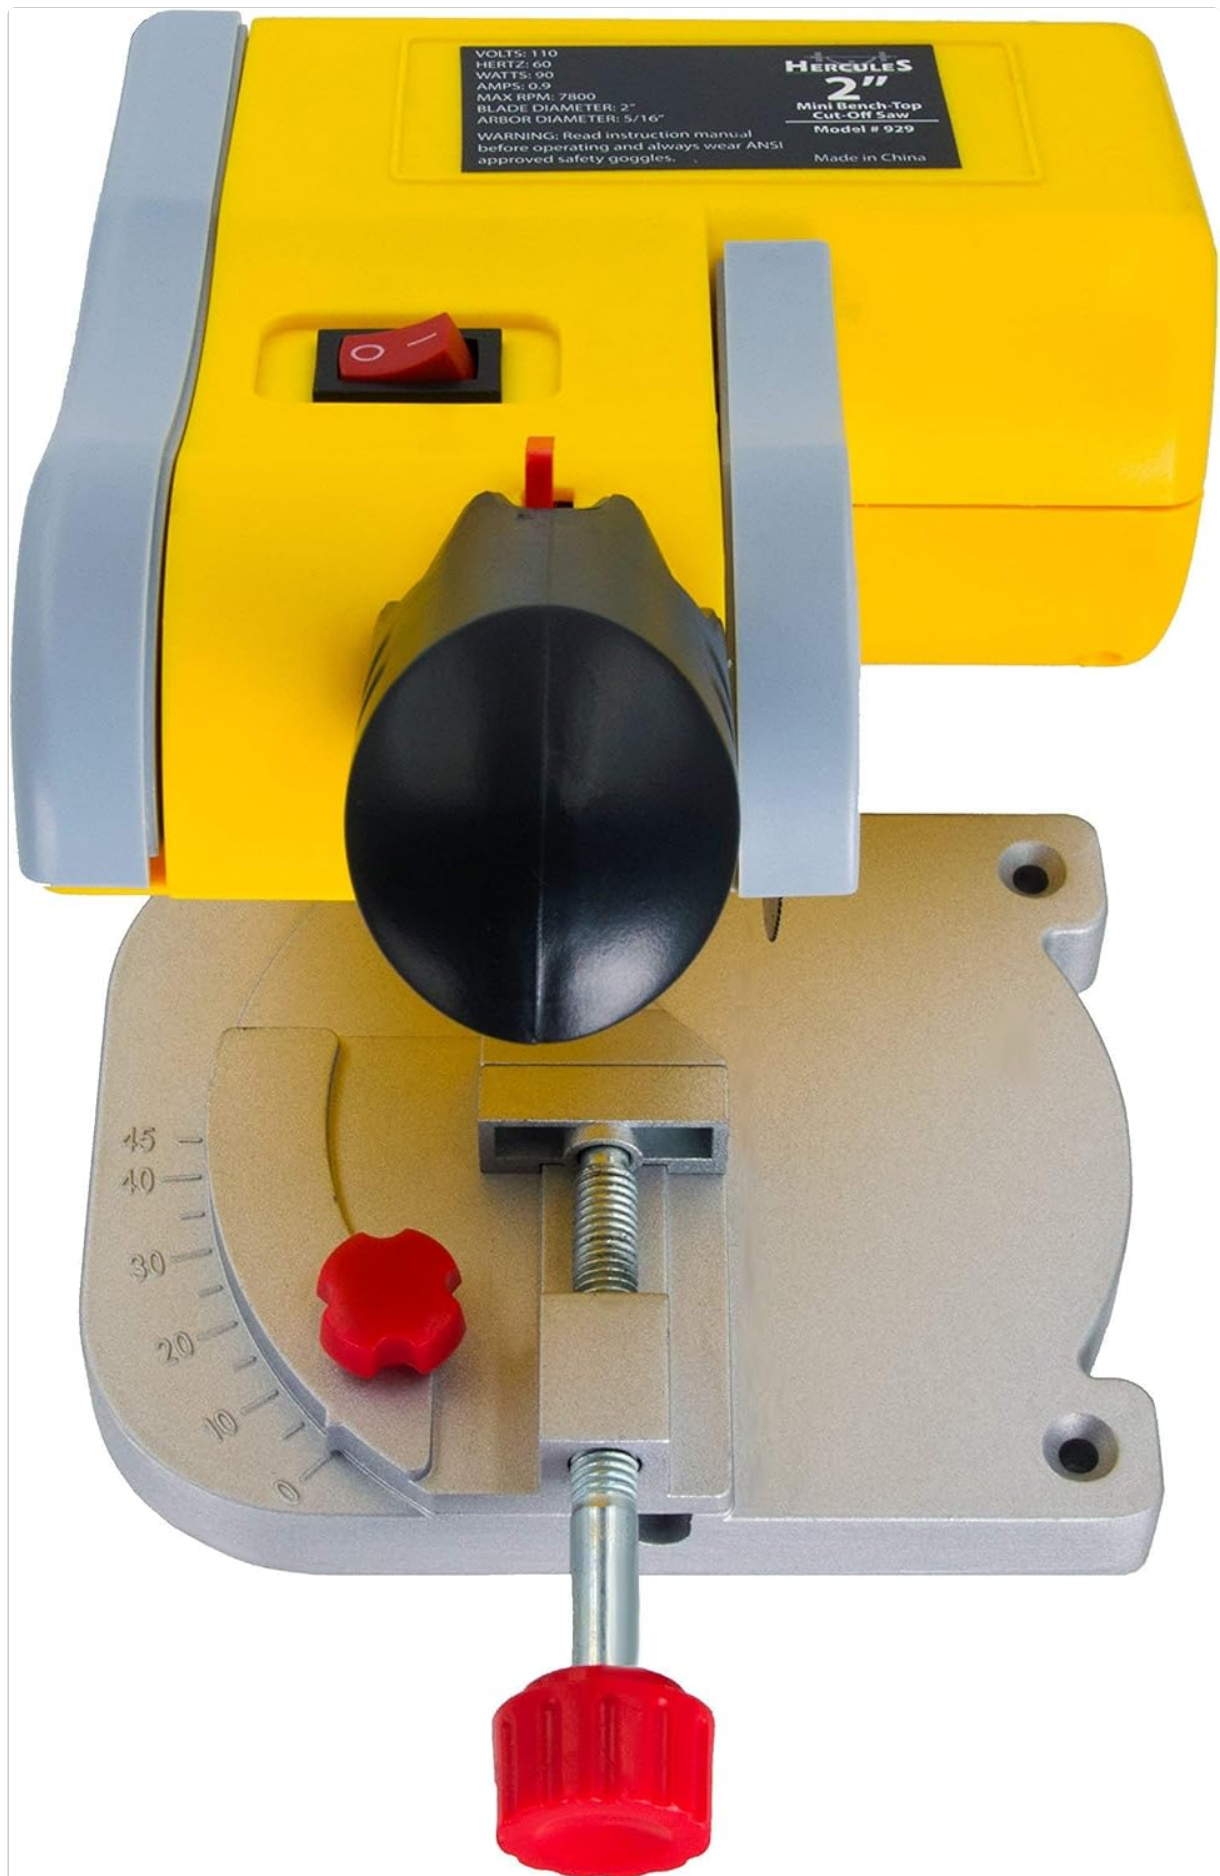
Top view of the saw, illustrating the adjustable base plate with angle markings and the material vise for securing workpieces.
